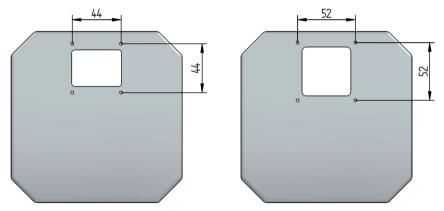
Distances of the threaded mounting holes for adapters and filter wheels on the G3 and G2 cameras (left) and G4 cameras (right)
